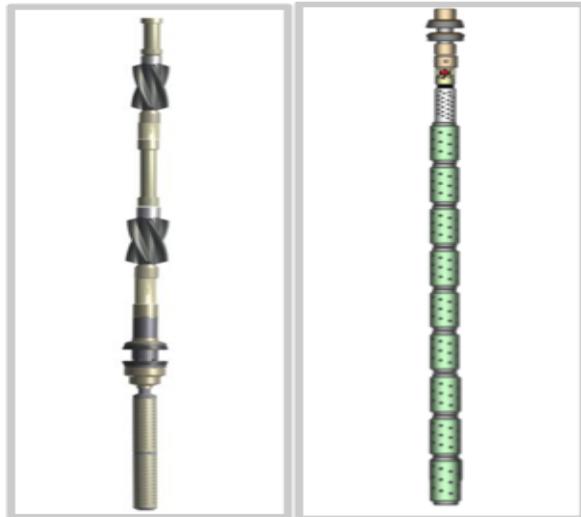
Hydrawash tool with HydraArchimedes and TCP guns attached. Upper and lower part of the tool respectively. After (4).
